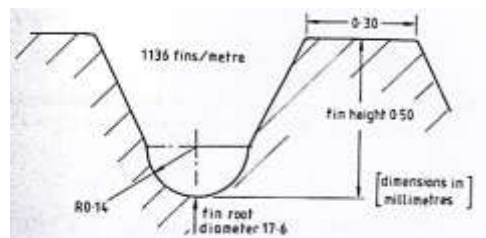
Cross section of lo-fin tube Cooper (1990)
